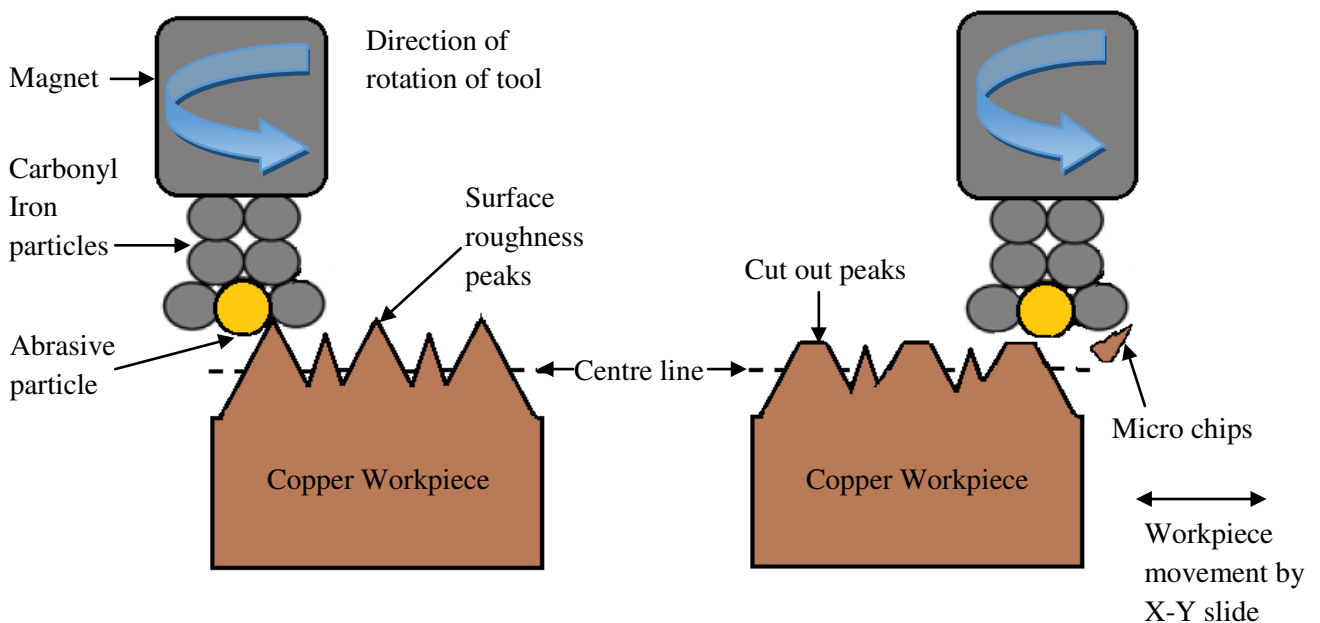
Mechanism of finishing performed by the proposed magnetorheological finishing tool
